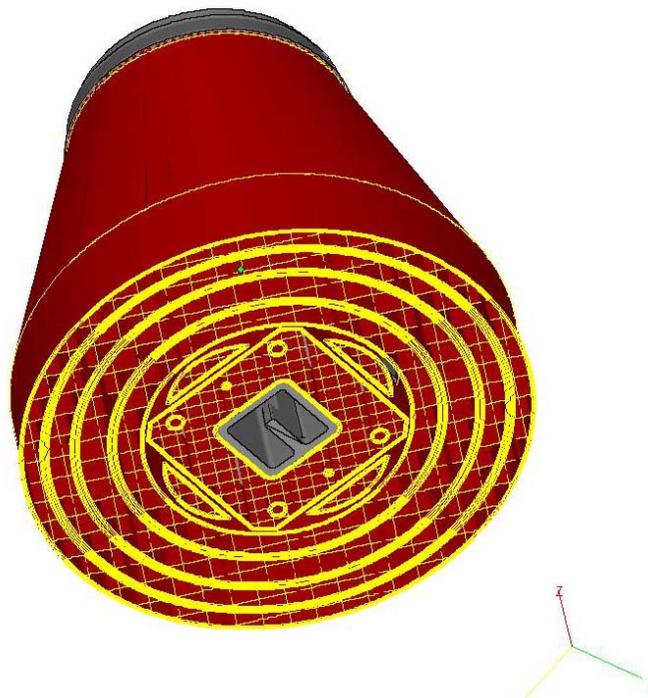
3D CAD drawing of the part and enclosing support structures that would have been required to build the waveguide part, as originally designed.
